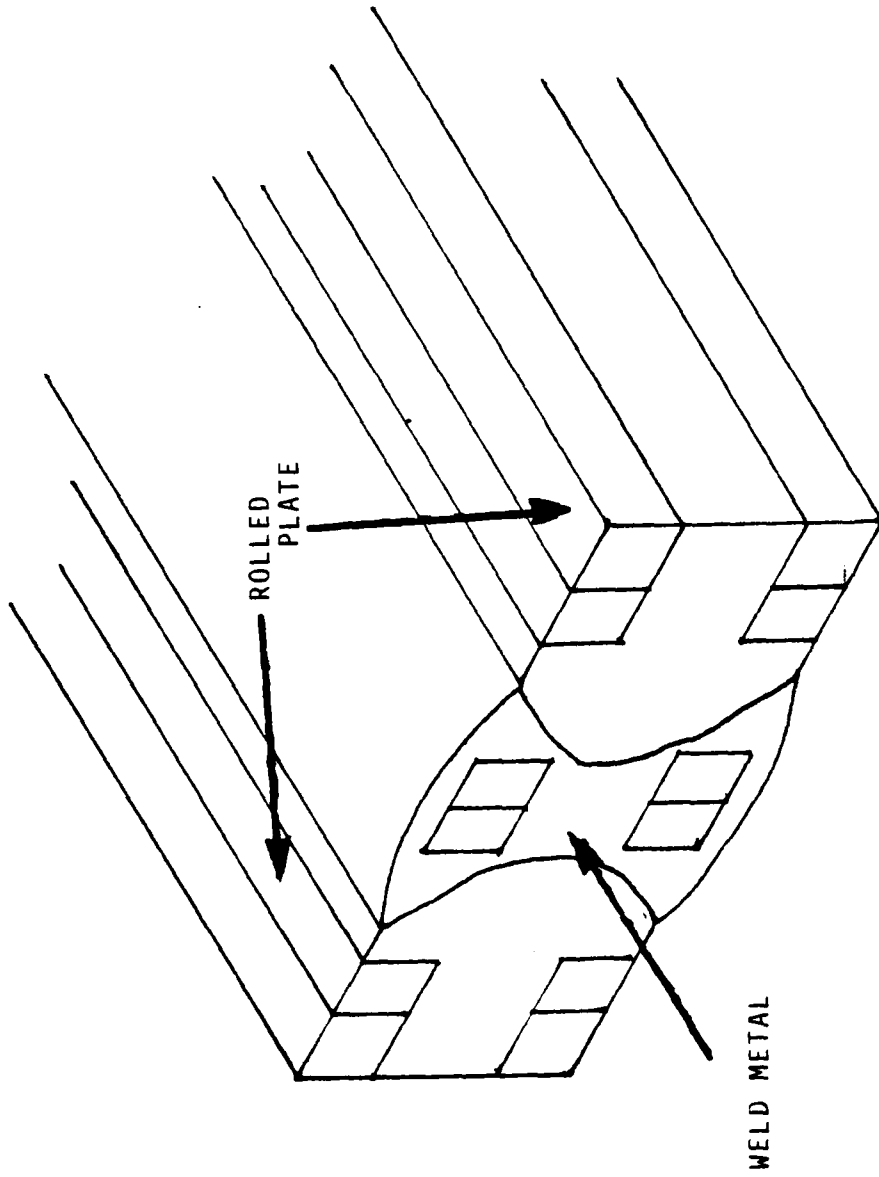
Illustration of weld metal and rolled plate blank location
